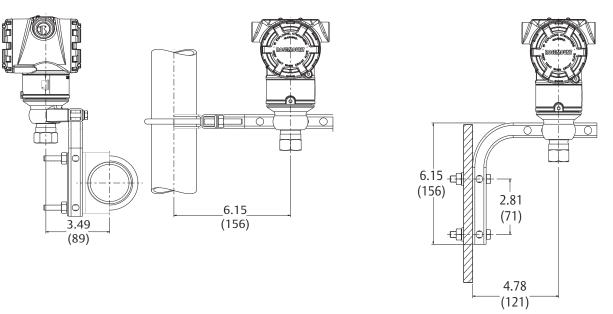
Rosemount 3051T Typical Mounting Configurations with Optional Mounting Bracket Pipe mounting Panel mounting
